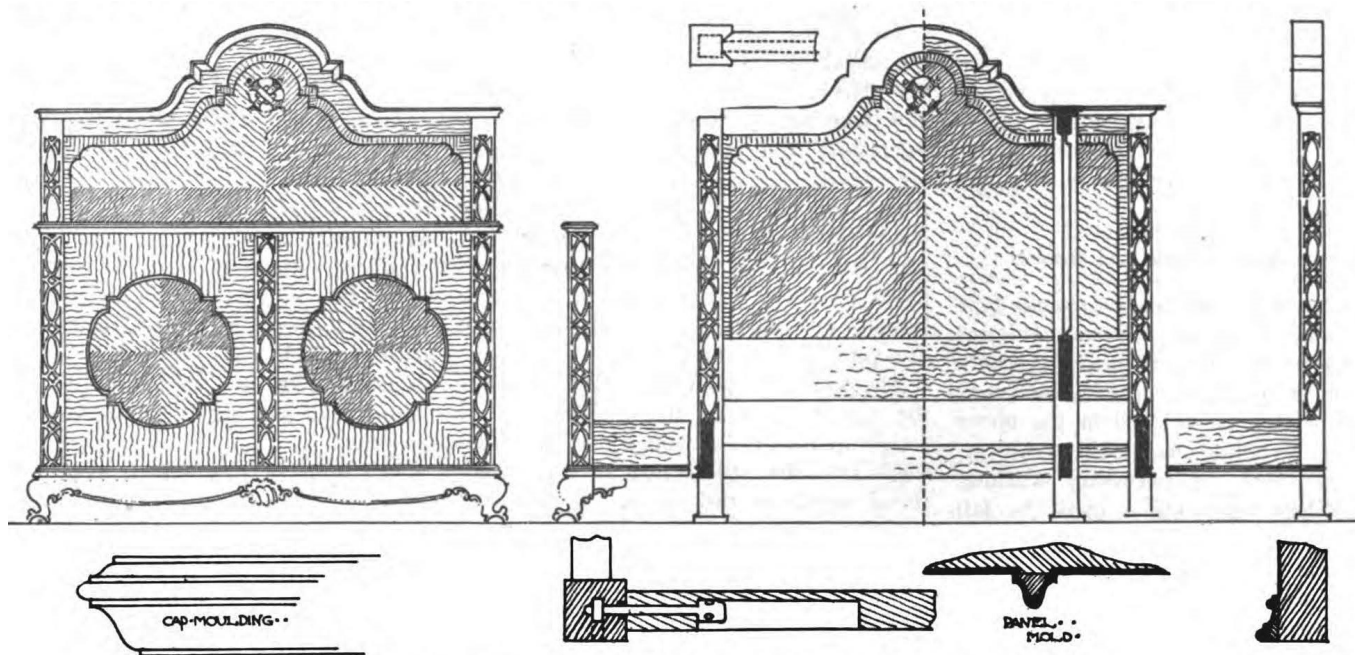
Elevations and Working Details of the Bedstead Shown in Fig. 2
